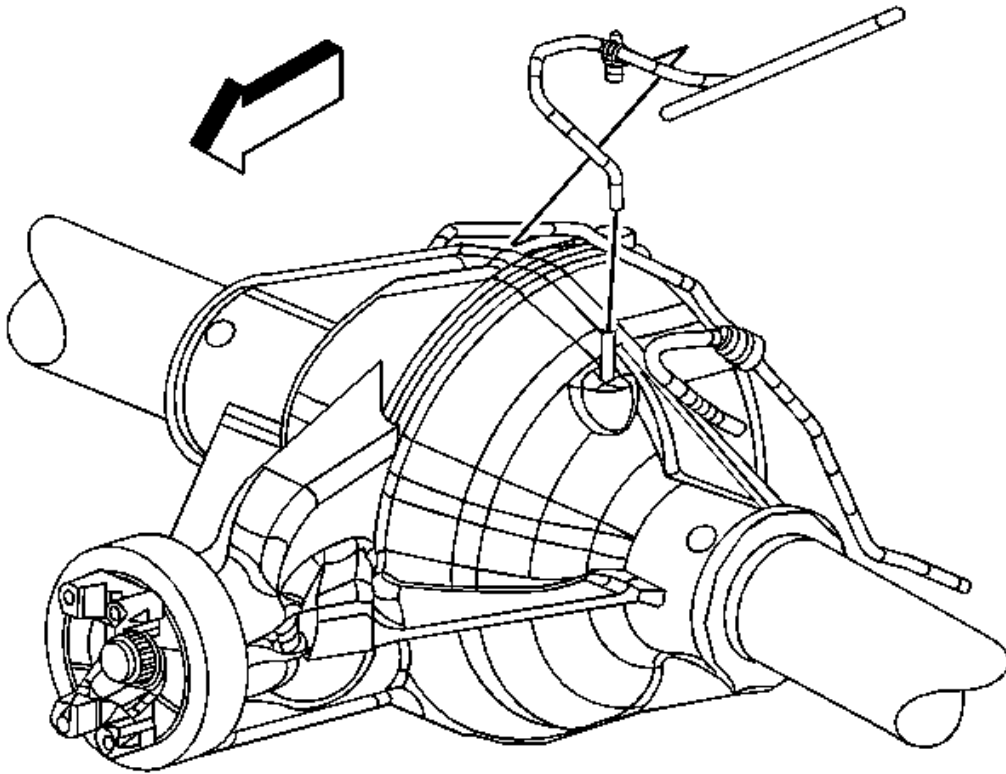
View Of Vent Hose Swivel Clip & Rear Brake Crossover Pipe
